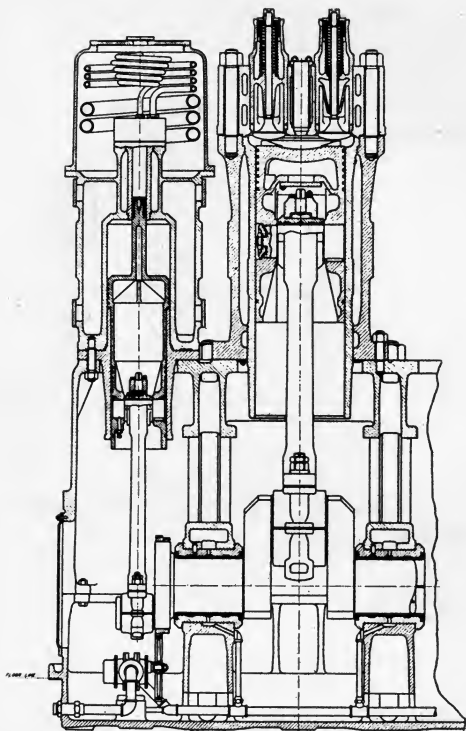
Section of Busch-Sulzer Bros.-Diesel Engine.
